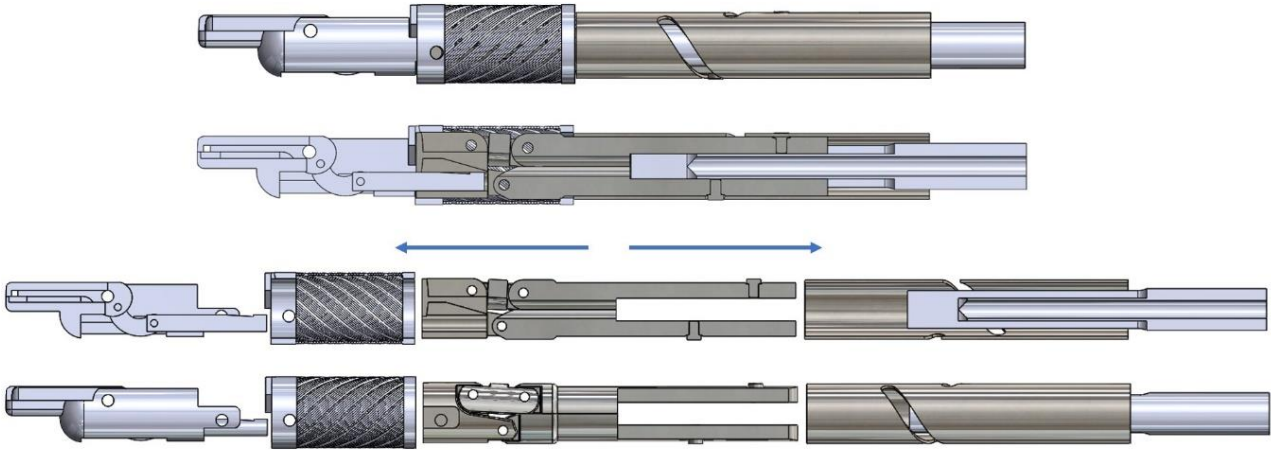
Assembled and disassembled overview of the instrument, with cut throughs.
